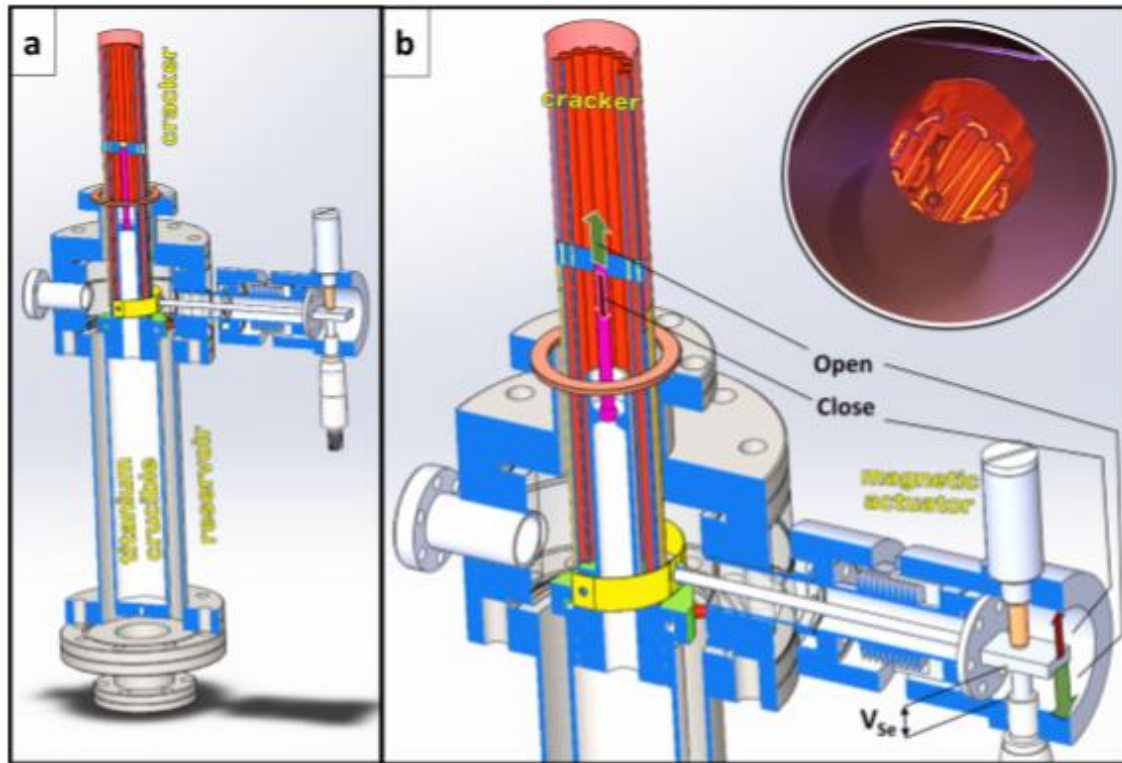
(a) 3D-CAD design of the entire selenium cell. (b) an enlarged drawing of the valve/cracker region. [76]
